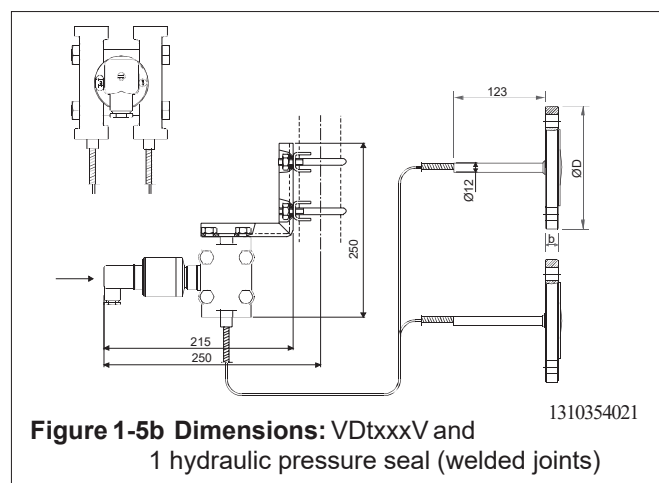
Dimensions: VDtxxxV and 1 hydraulic pressure seal (welded joints)
